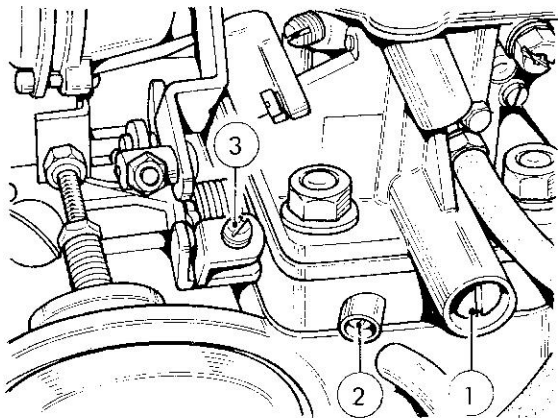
32 Slow-running adjustment screws on the Solex 32/32 DIDTA carburetter
